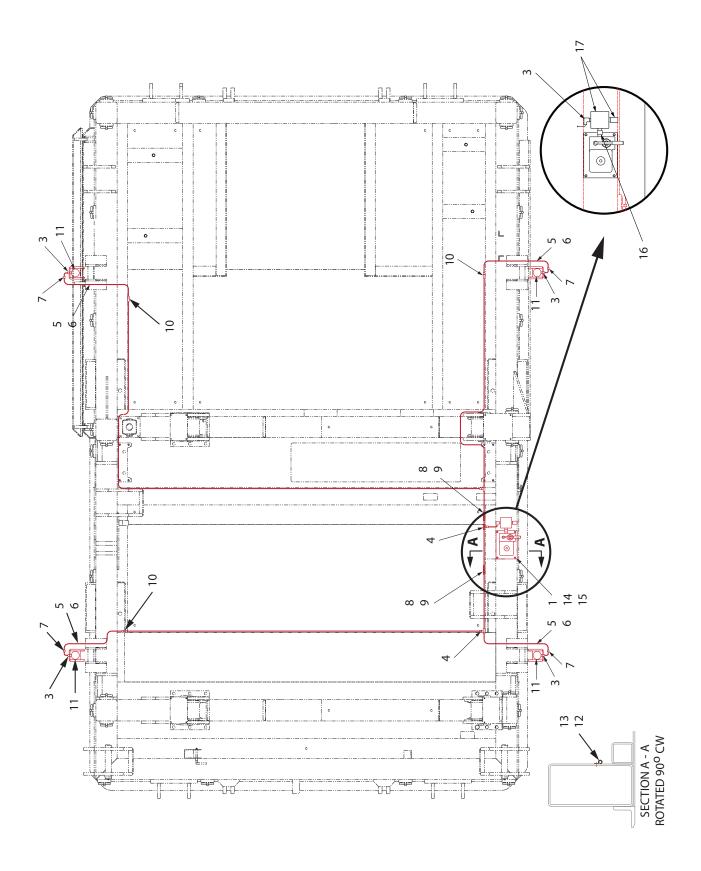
AGSE-E16626-S04 Cradle Jack Assembly
